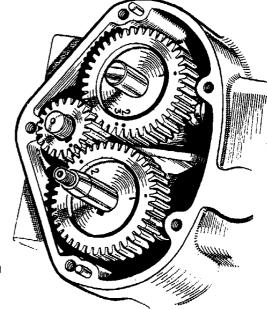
VALVE-TIMING MARKINGS FOR 1954-55 ENGINES
